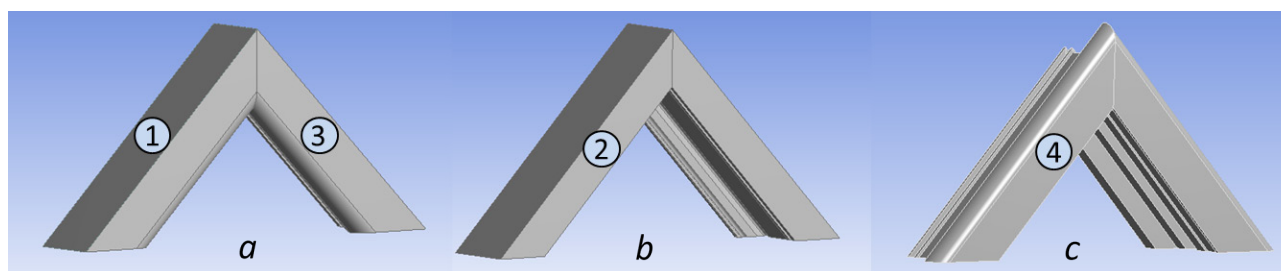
Specimen cutting locations for each series: a – outer part of the sash, b - inner part of the sash, c - inner part of the frame.
